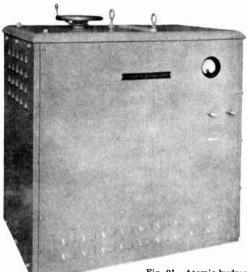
Atomic-hydrogen arc-welding equipment
